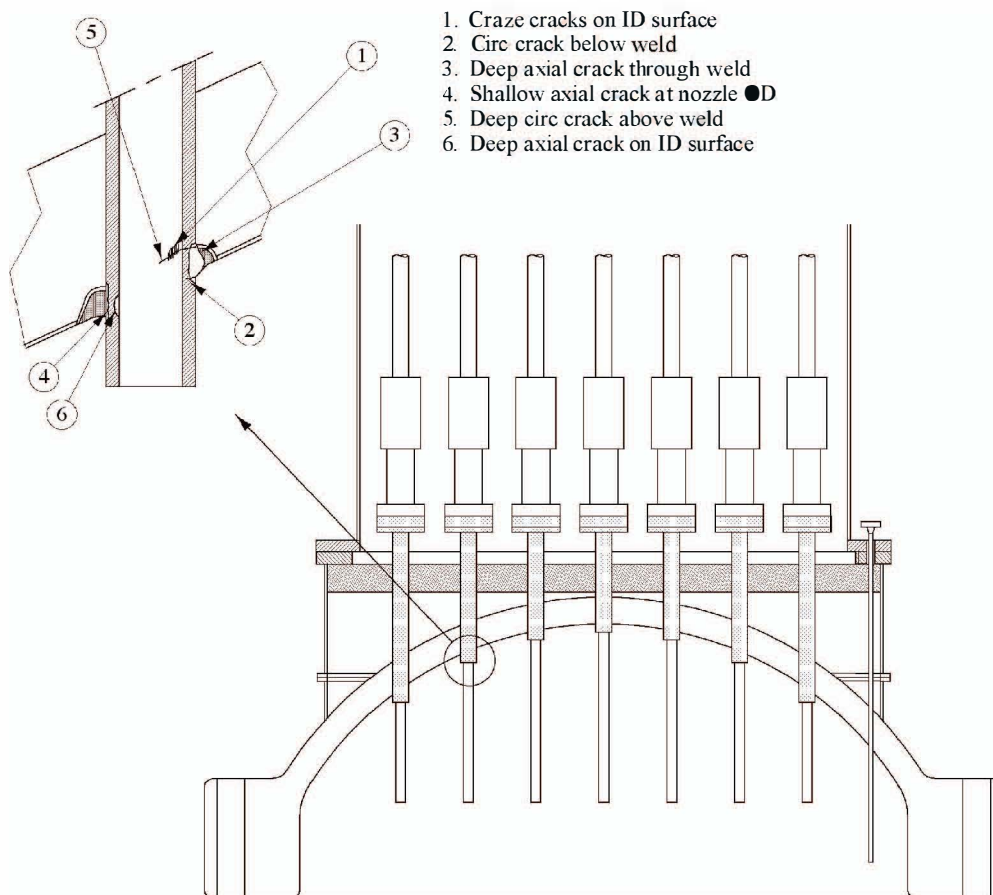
Location Of Typical PWR Reactor Vessel Closure Head Nozzle PWSCC (Alloy 600 CRDM Nozzle Shown with Alloy 182 J-groove Weld and Buttering, Low Alloy Steel Shell, and Stainless Steel Cladding), White et al., 2003.
